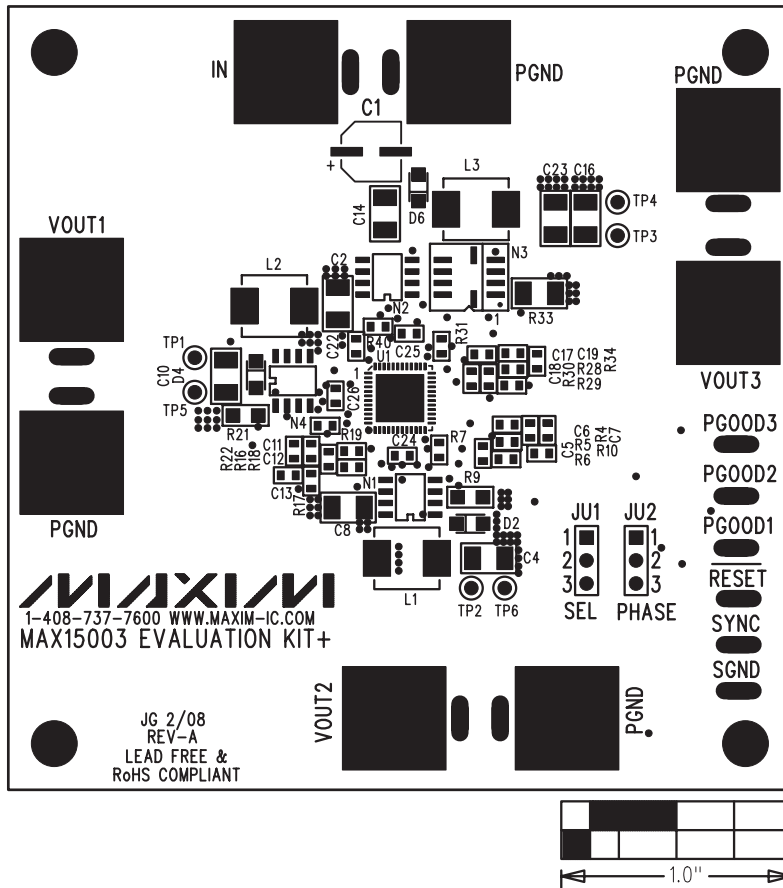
MAX15003 EV Kit Component Placement Guide—Component Side
